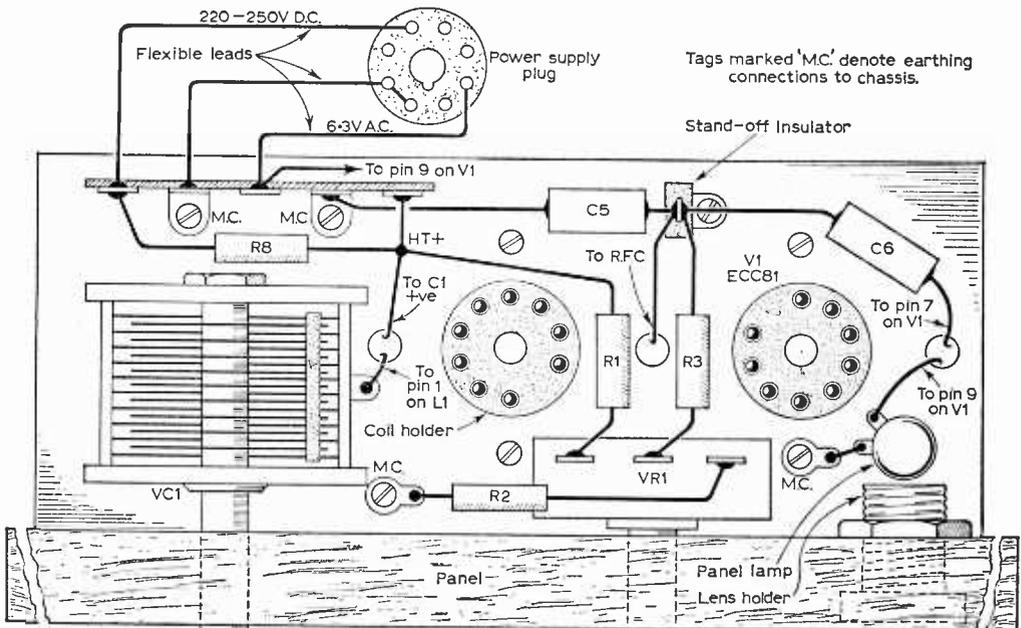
The above-chassis layout and wiring of the receiver unit.
